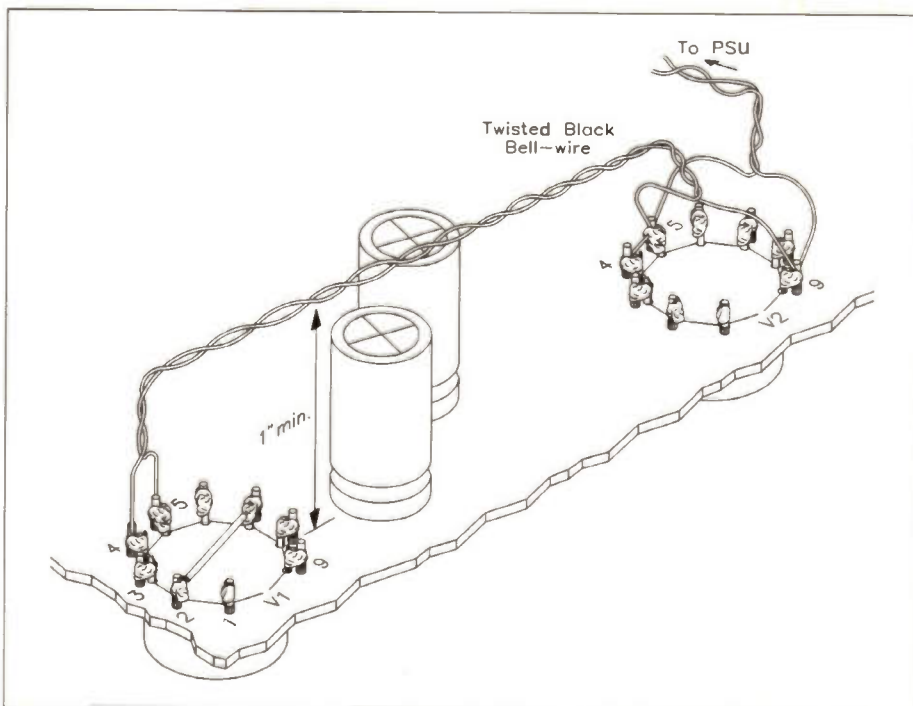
Heater wiring details for PCB mounted valves V1 & V2.
